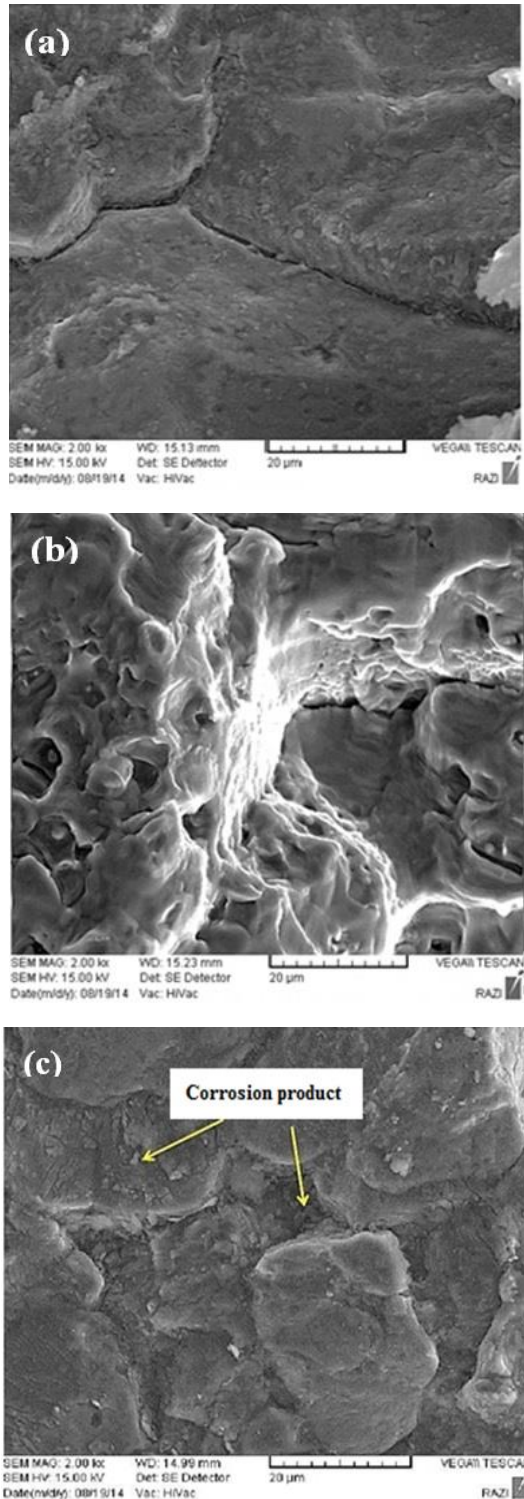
SEM fractography of initiation of an internal crack on the corrosion fatigued fracture surface (a and b) and corrosion product around internal crack.
